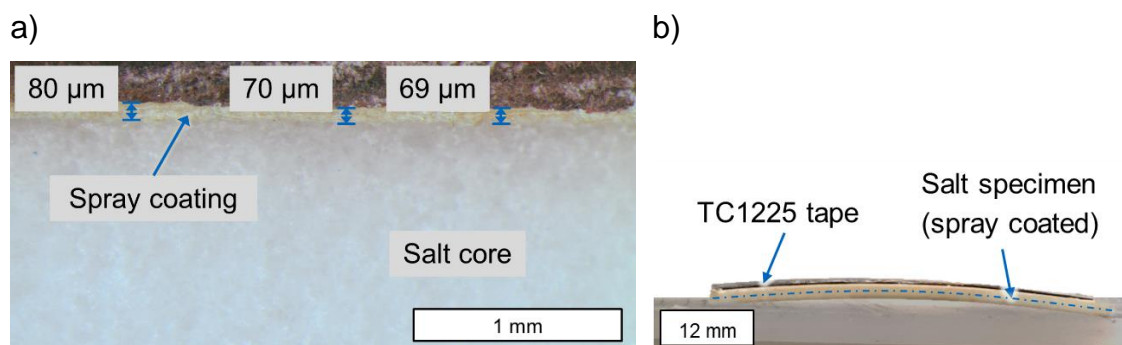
a) Spray coating layer thickness and b) specimen warpage after hot pressing of TC1225 [76].
